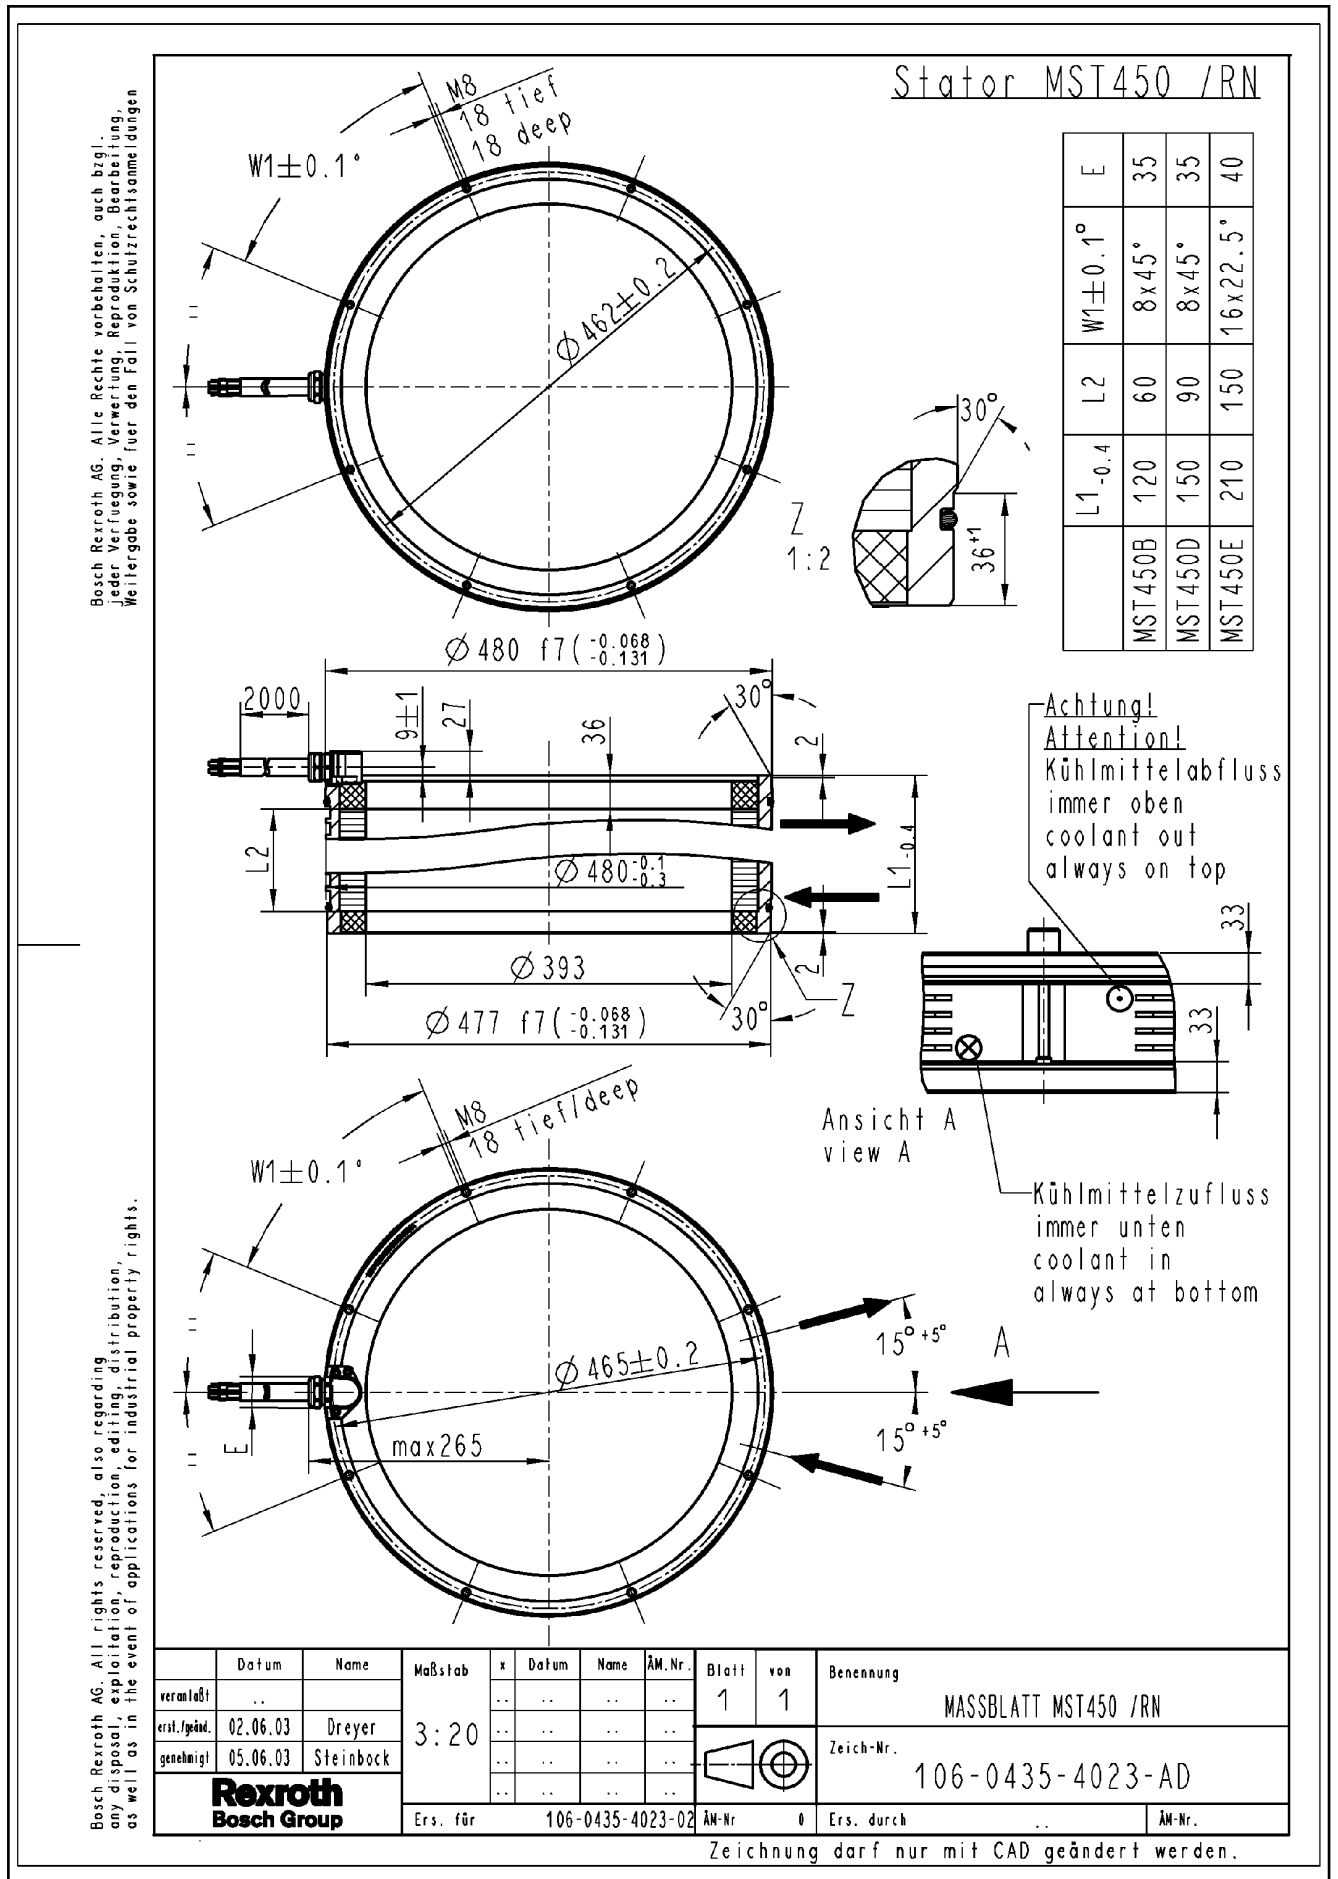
Dimension sheet MST450, electrical connection "RN"
